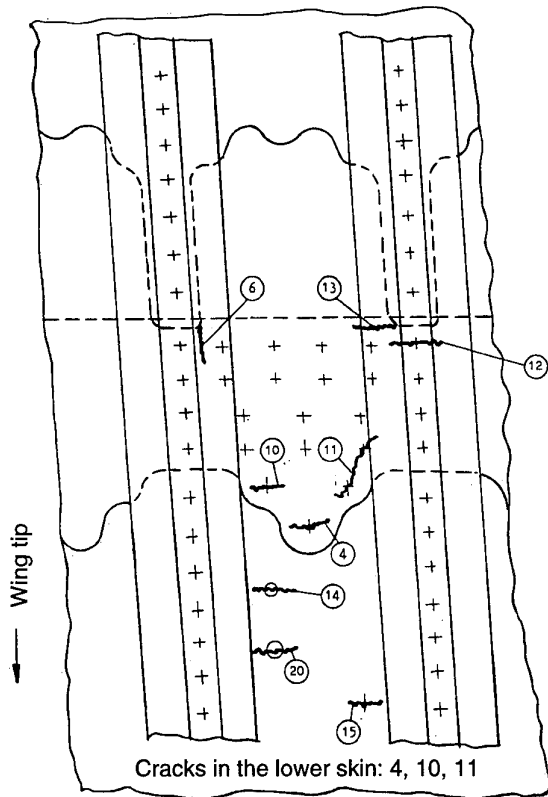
Type of fatigue cracks close to the $Y_{34}2140$ skin joint at the end of the fatigue test.
